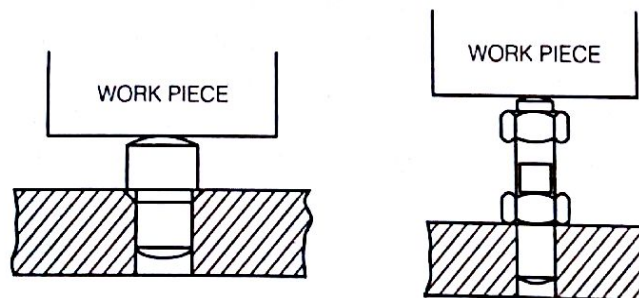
Fixed type support pin and adjustable type support pin
